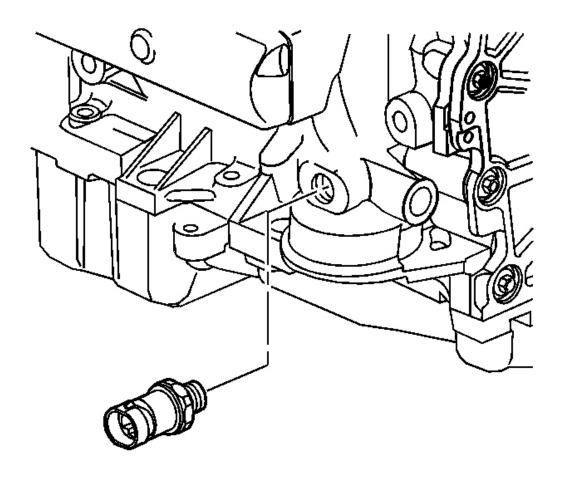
View Of Oil Pressure Switch Courtesy of GENERAL MOTORS CORP.
